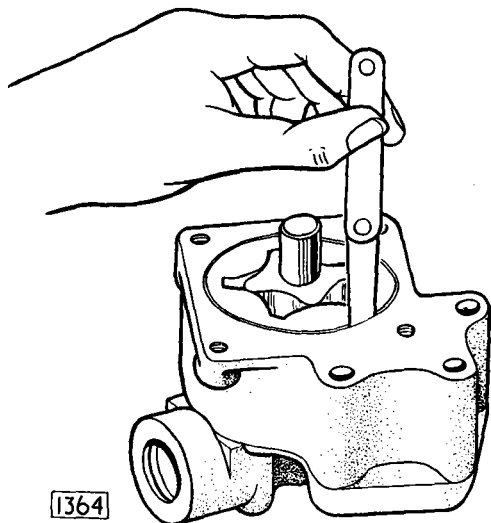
Measuring the clearance between the outer rotor and the pump body
